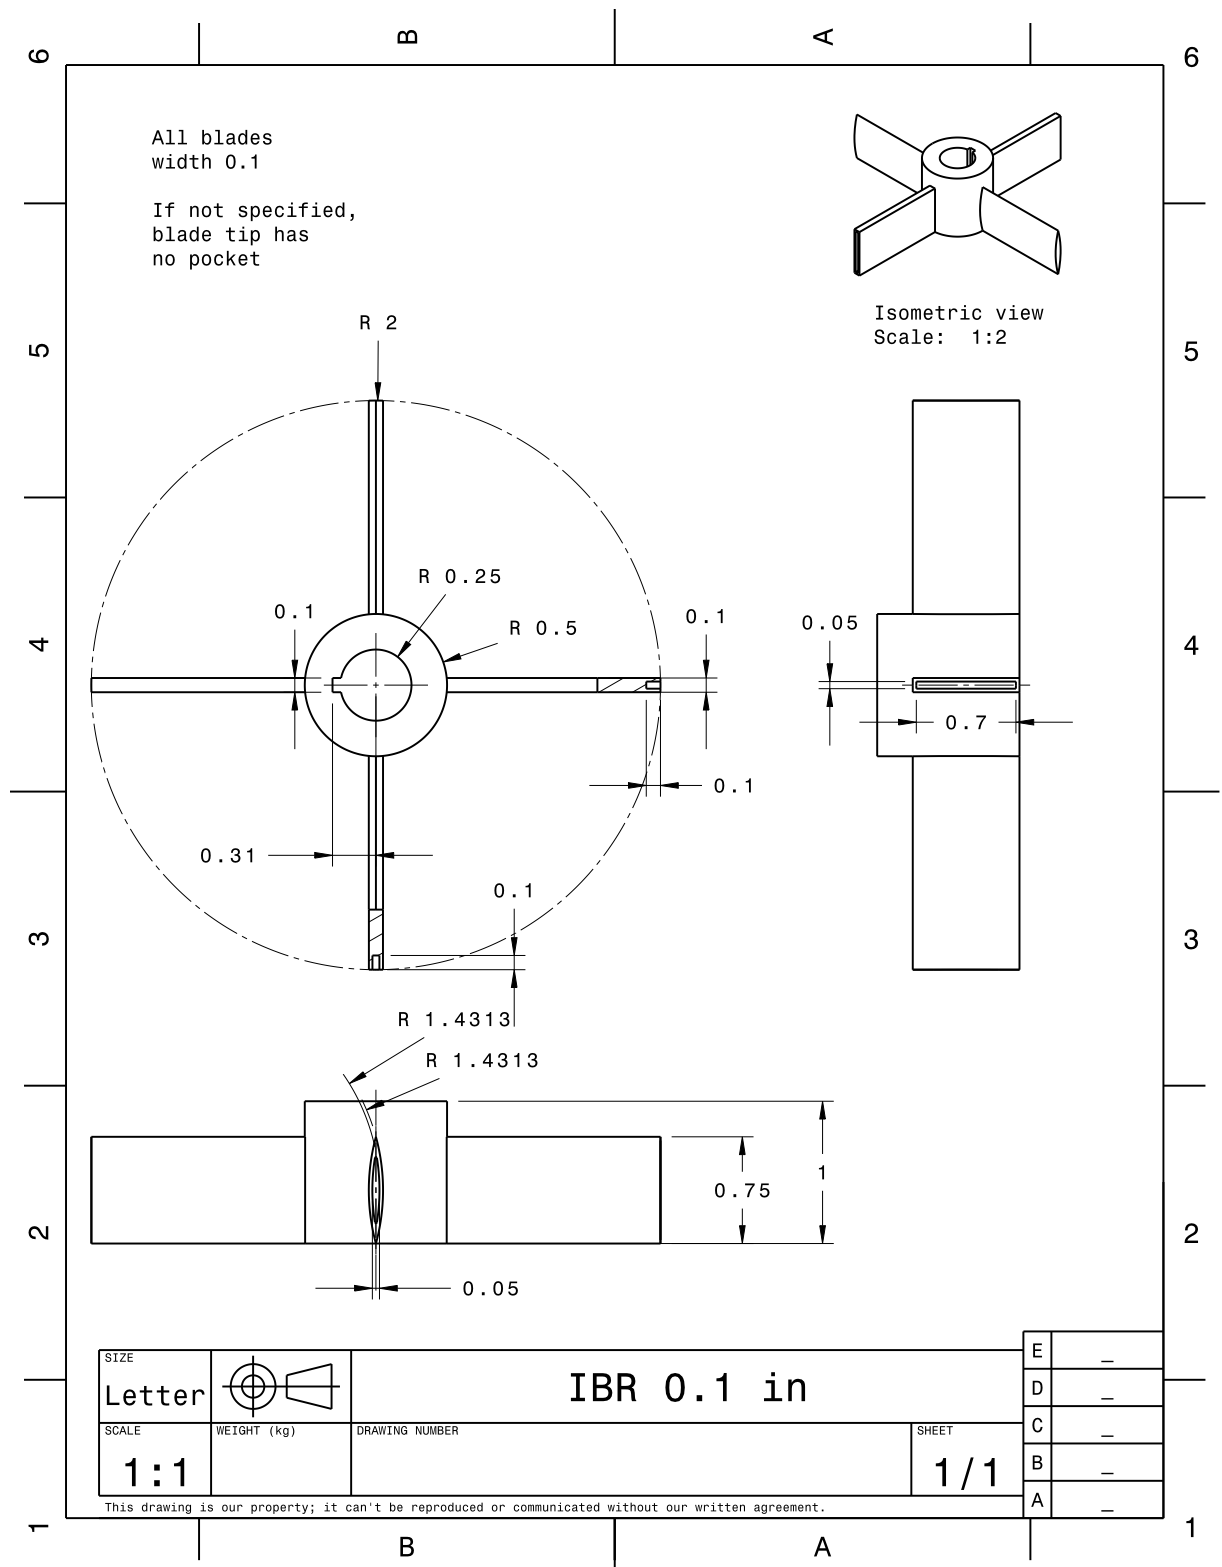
Technical drawing of IBR with blade width 0.1 in
